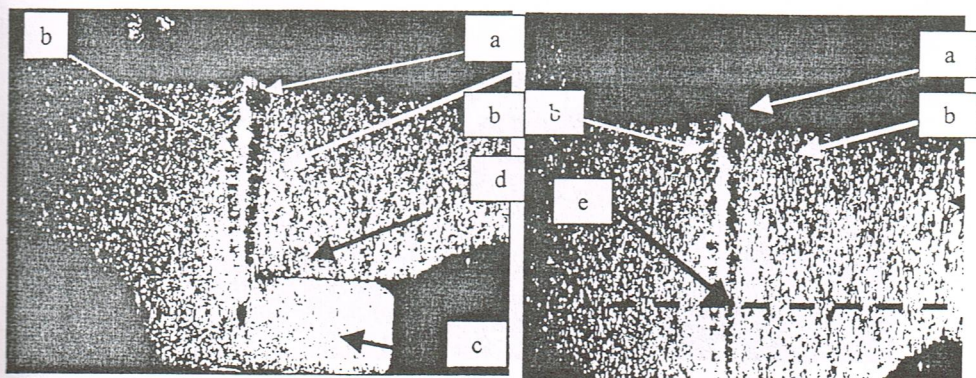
Microstructure of a joint, A – previous design, B - modified joint: a - weld, b – weld affected zone c - overlap, d - area of blistering, e - line of the overlap removal.
